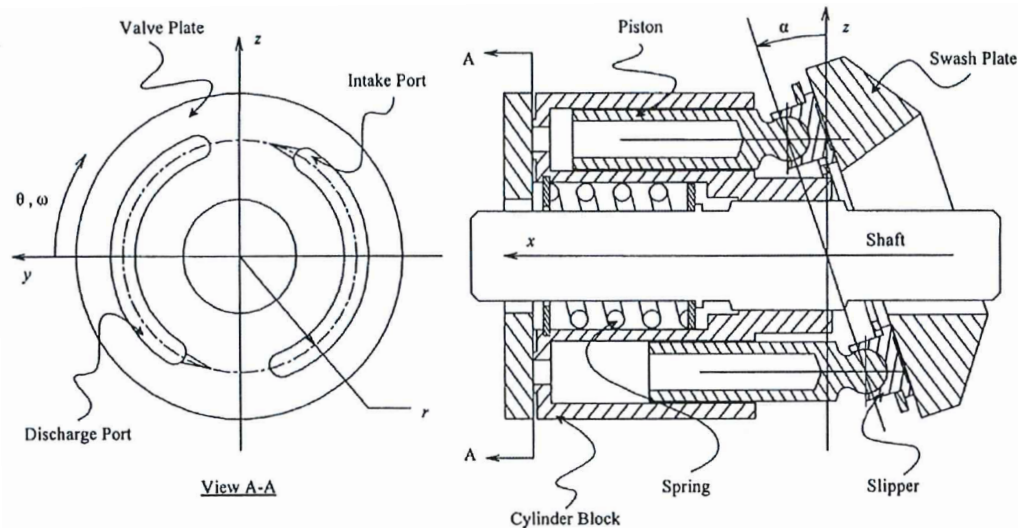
Cutaway axial swash plate piston pump schematic [12].
